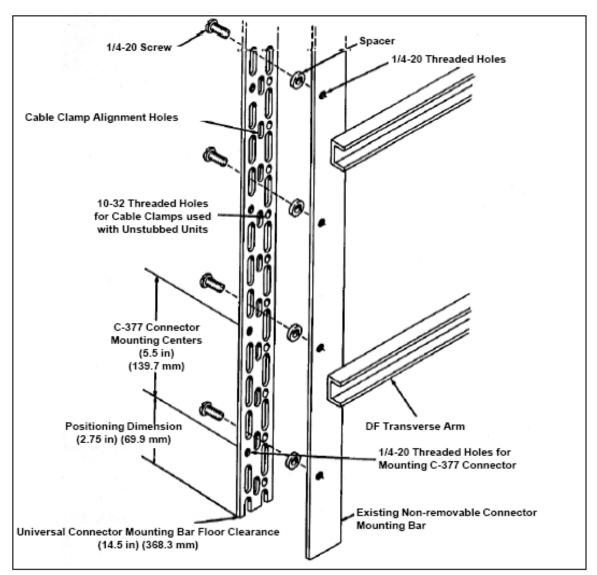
Installing the Universal Connector Mounting Bar on Non-removable Frame Mounting Bar
